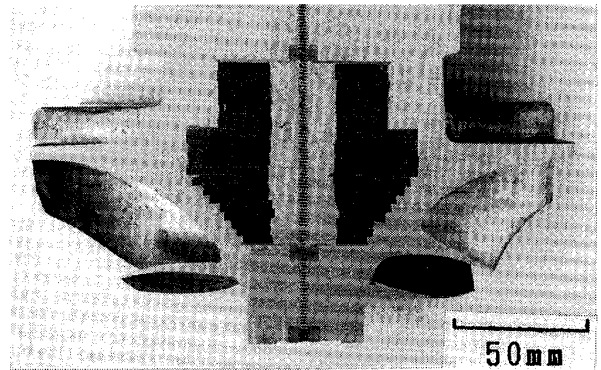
Macro photograph of cross section of alumina-fiber/aluminum composite impeller.
